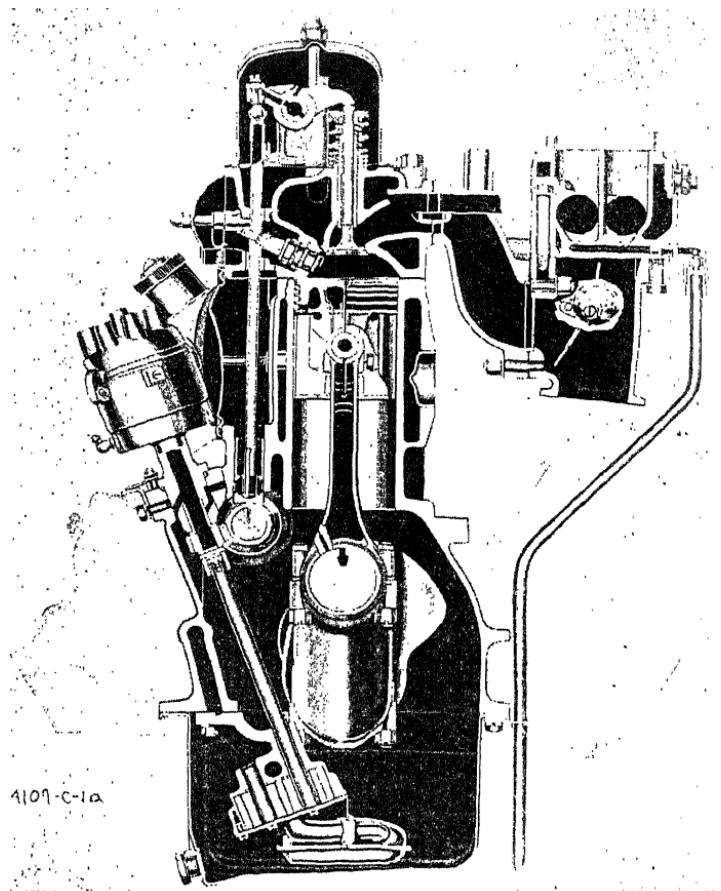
Buick (1937) Engine with Clamp Type Connecting Rod
